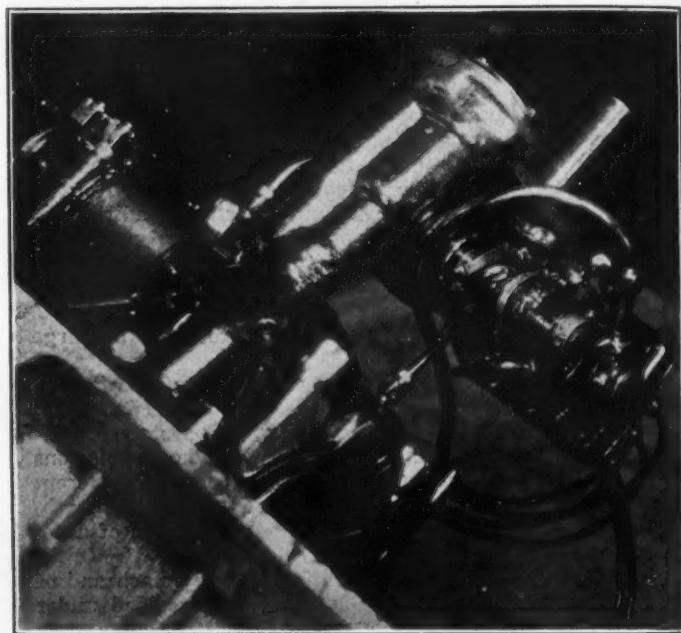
COMBINATION-SYSTEM LUBRICATOR-ASSEMBLY
